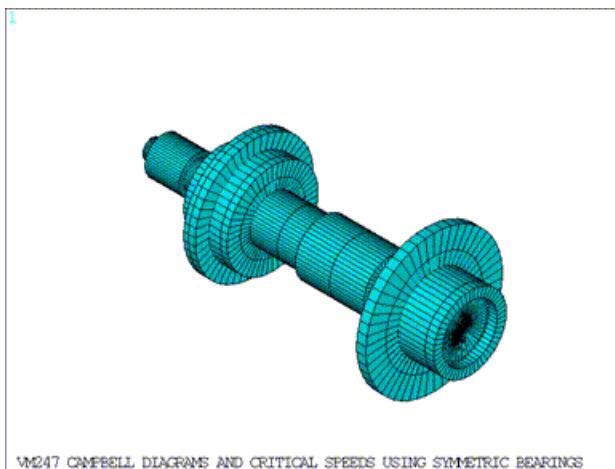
Isometric View of the Rotor Bearing SystemTable 247.1: Geometric Data of Rotor-Bearing Elements
